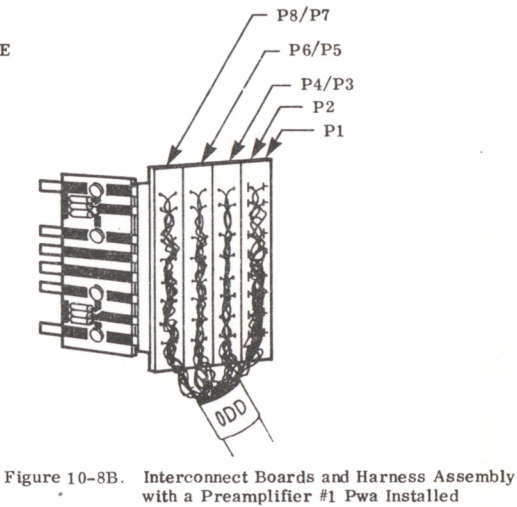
B. Interconnect Boards and Harness Assembly with a Preamplifier #1 Pwa Installed
